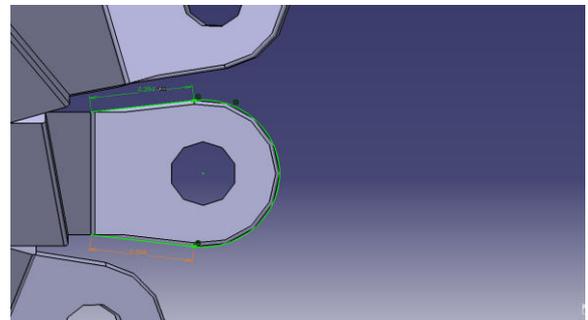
Design and Dimension of Pad and the Dimension of the Quadrant
